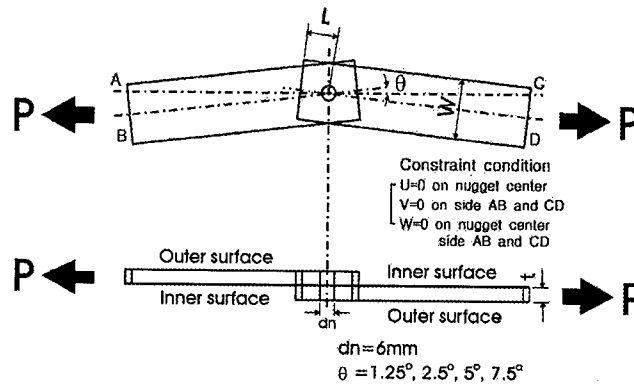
Configuration of in-plane bending type spot-welded joint.
